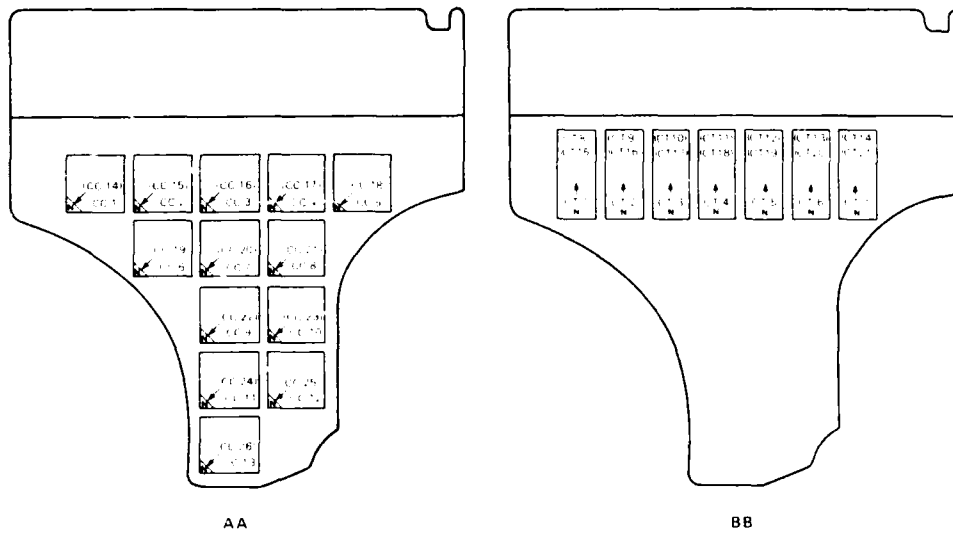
Disc cut-up drawing indicating location of each specimen for the AGARD engine disc programme.
